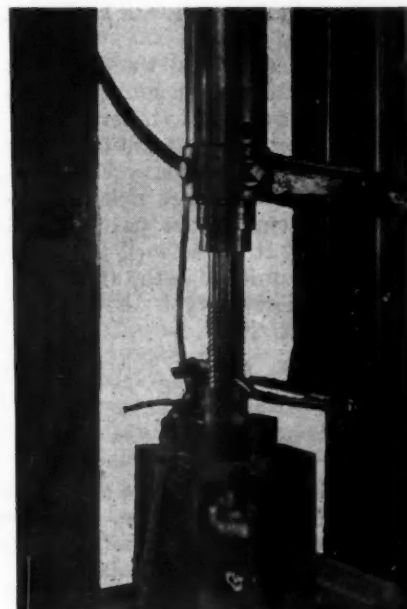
Roughing is done on a single spindle Oilgear broaching machine, three rings being handled at a time. Production is 500 pieces per hour with one operator
